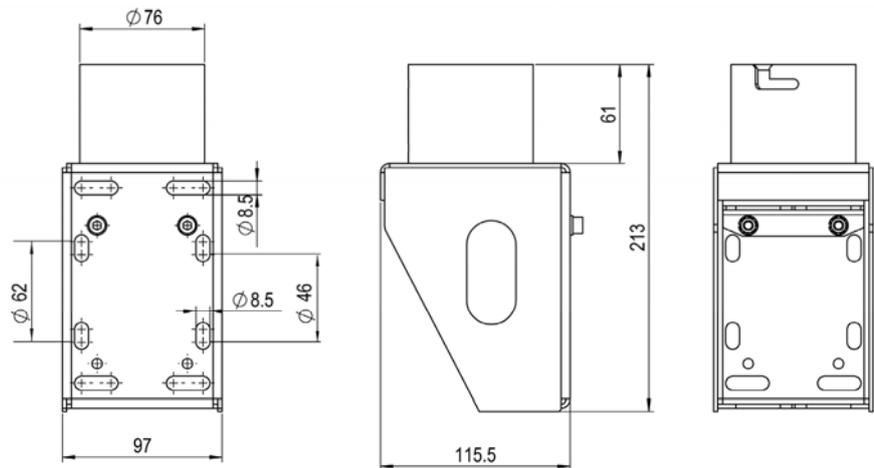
Ultrasonic Wind Sensor WMT703 Dimensions in Millimeters
